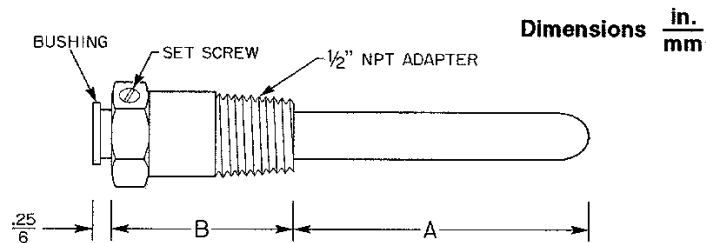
Part Number FTG13A-600R Packing Nut Assembly. (Use with clamp-on bulb for direct immersion application.)
